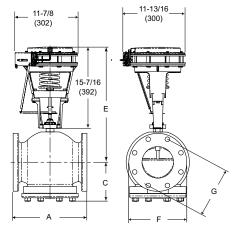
MK-6911 with VB-8213 Flanged 2-Way Globe Valves $^{\rm a}$
